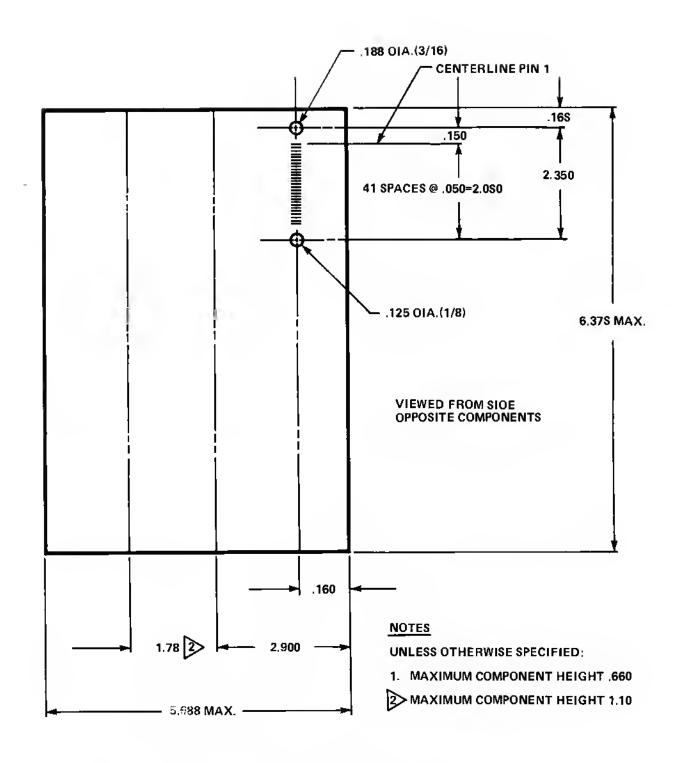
EXPANSION INTERFACE "ADO-ON" BOARO OUTLINE OIMENSIONS
